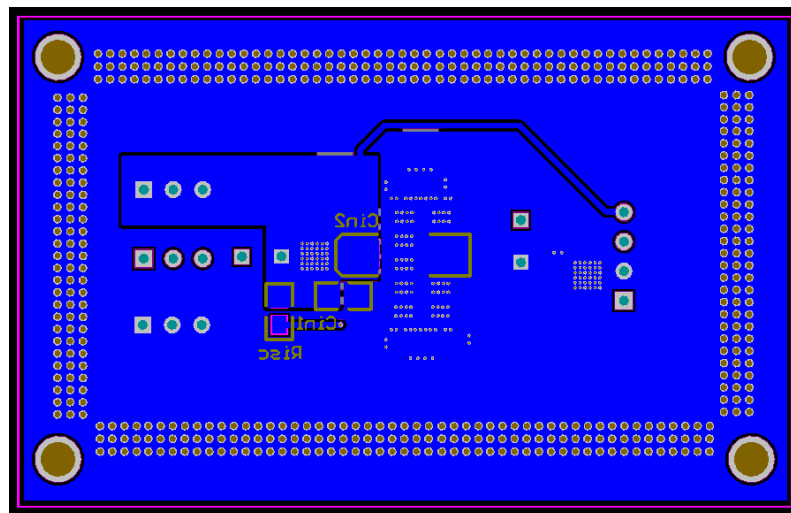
Layout of the board used by ST for the single event tests of the RHFL6000, bottom view
